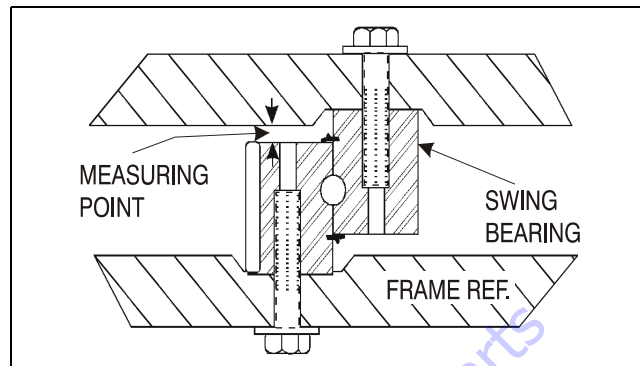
Swing Bearing Tolerance Measuring Point
